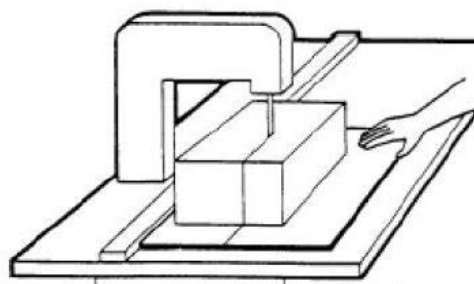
Cutting Formed AVONITE Flex Sheet Part on Band Saw
